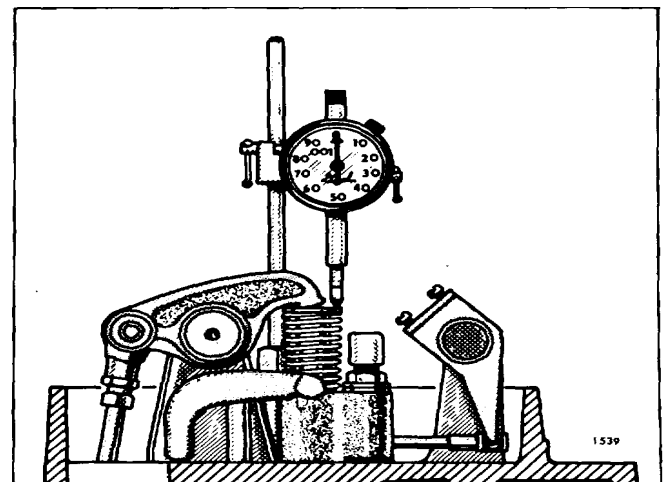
Checking Engine Timing By Measuring Injector Depression
